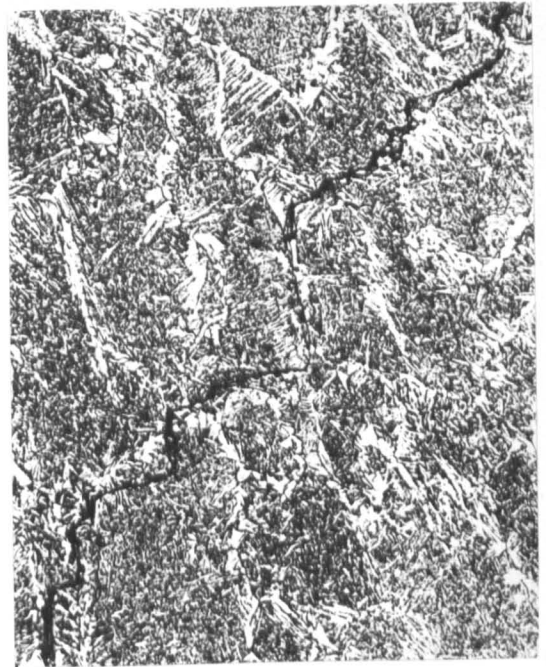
Chevron crack in a manual metal arc weld with electrodes B1. TP40.
